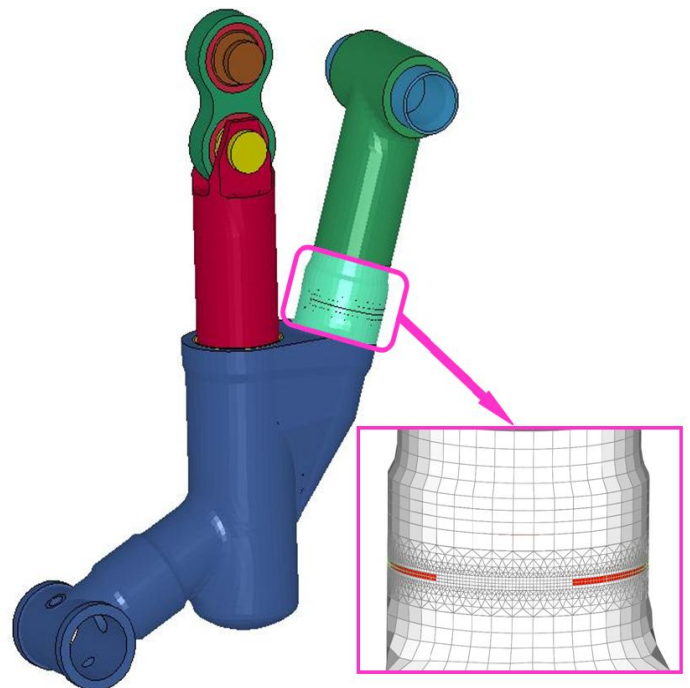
view of 3D model with the two gaps of fatigue fracture
